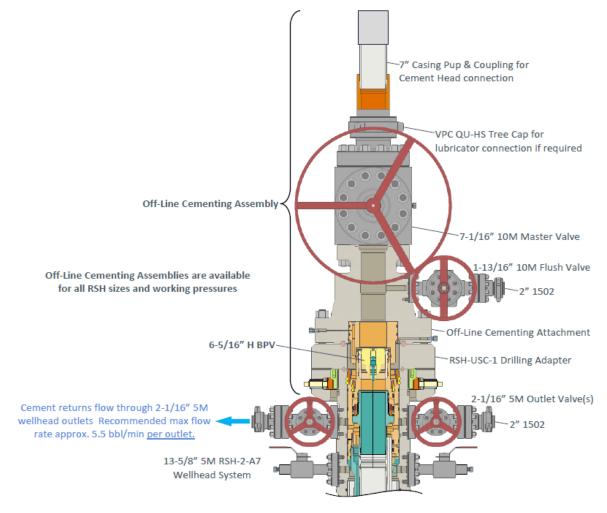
Vault 7" 5M offline cementing tool. Pressure rating limited by the lesser of 5M tool rating or the 7" pup joint and casing.
